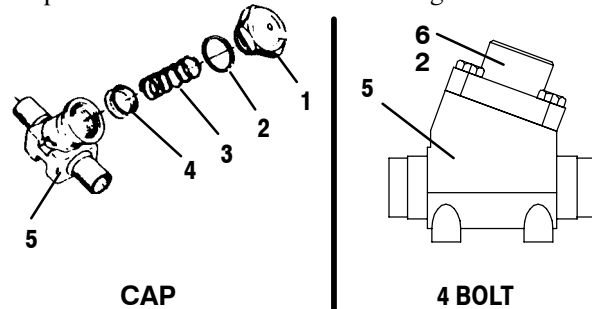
Compressor Unloader Valve – Suction Cutoff
